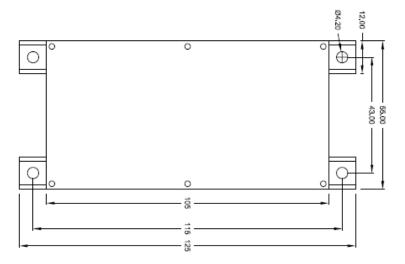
Mechanical Drawing of SPACE GPS unit: Box Top View
